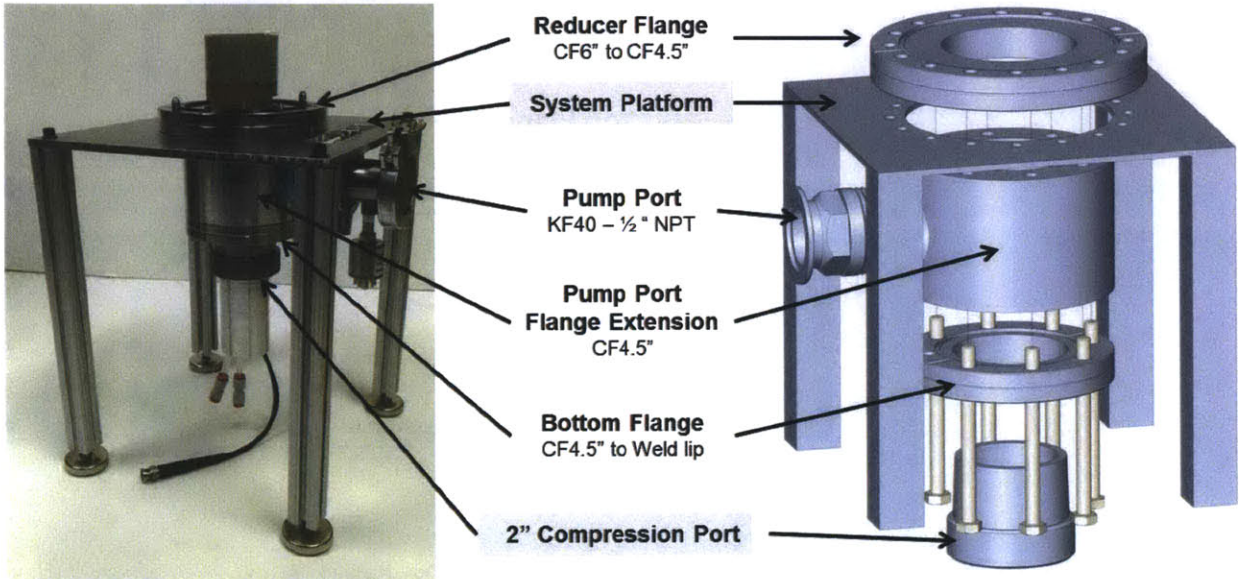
The lower chamber assembly and support platform. The platform is 14" tall to allow the chuck assembly to be raised and lowered. The actual lower chamber assembly shown on the left is pictured with the chuck assembly in place.
